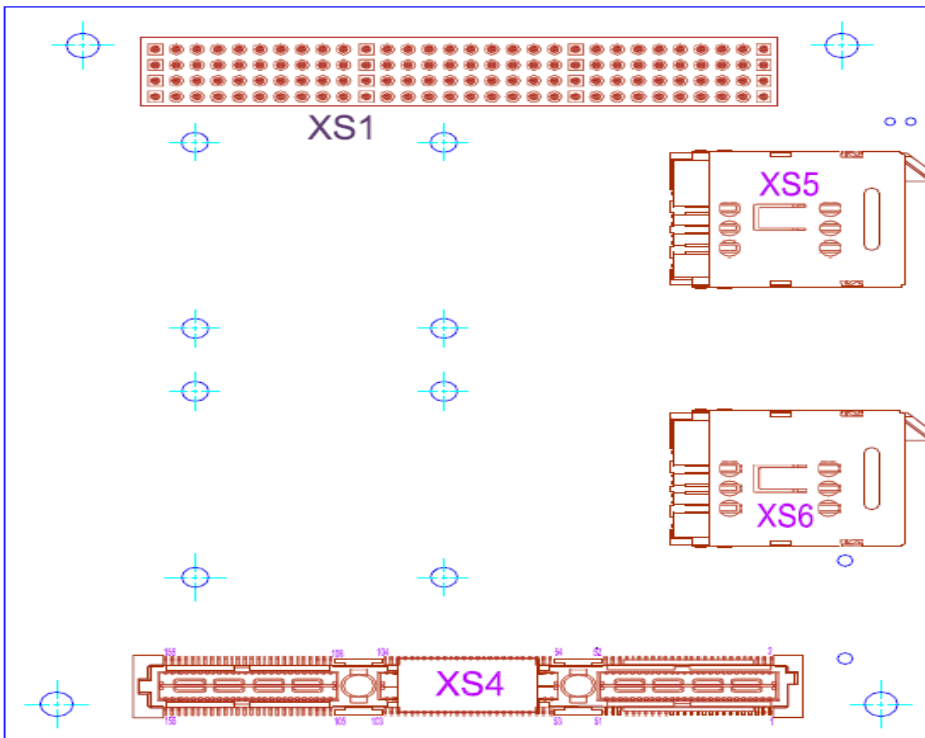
Location of KIC301 connectors on the BOTTOM side
